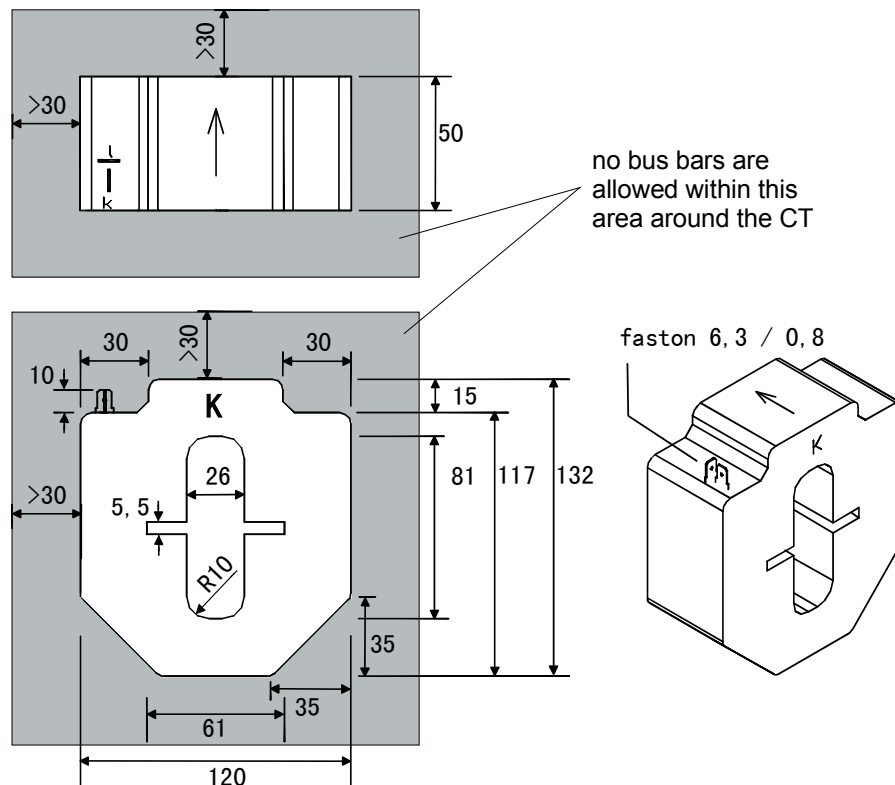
4 Dimension drawing current transformer for converters type A5 and A6
